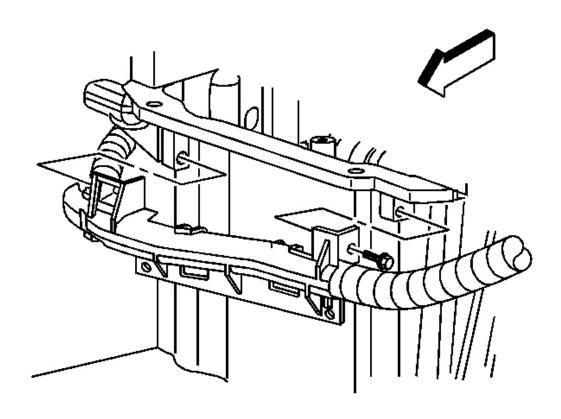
View Of Battery Cable Channel & Bolt Courtesy of GENERAL MOTORS CORP.
